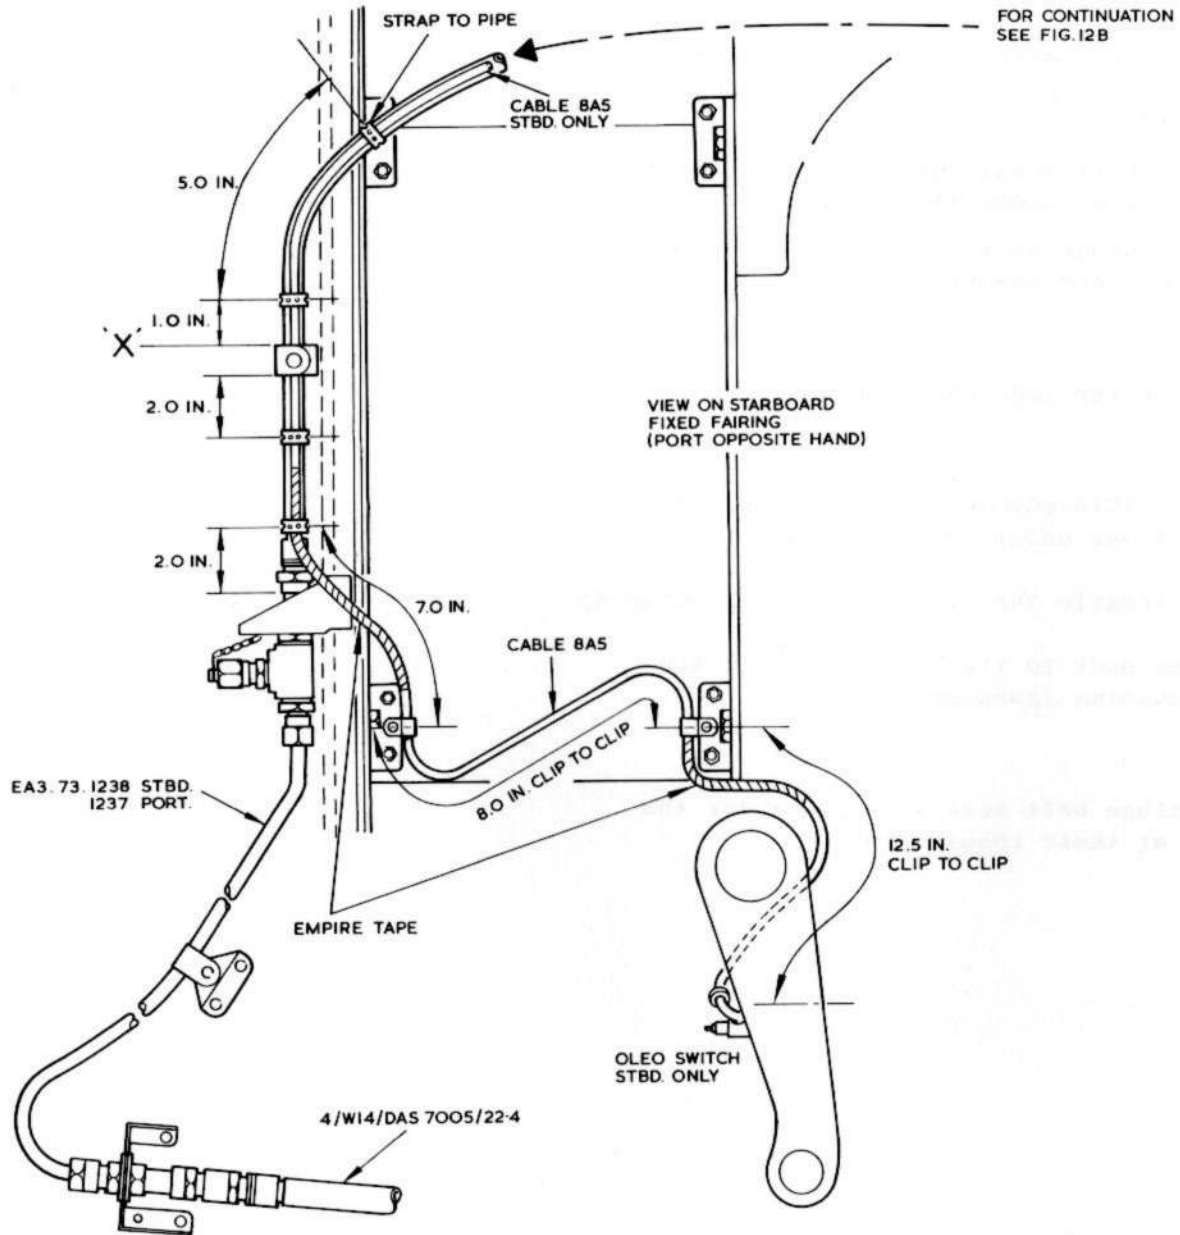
A. UNDERCARRIAGE - PIPING AND WIRING INSTALLATION
